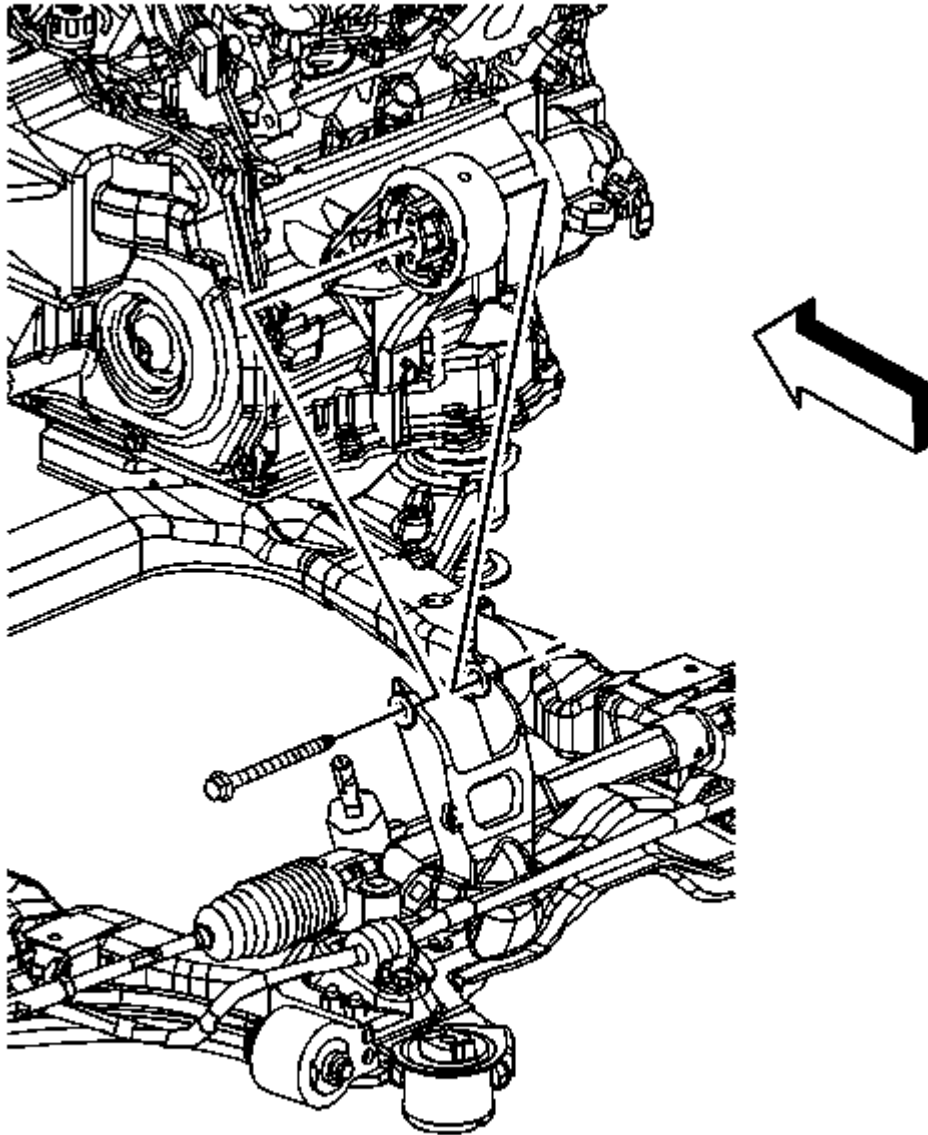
Identifying Rear Transmission Mount Through Bolt
